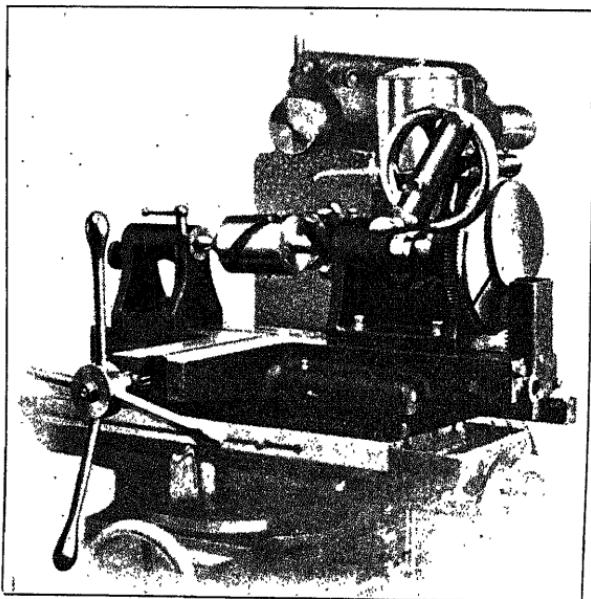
Milling a cylindrical cam groove. Brown & Sharpe Mfg. Co.
